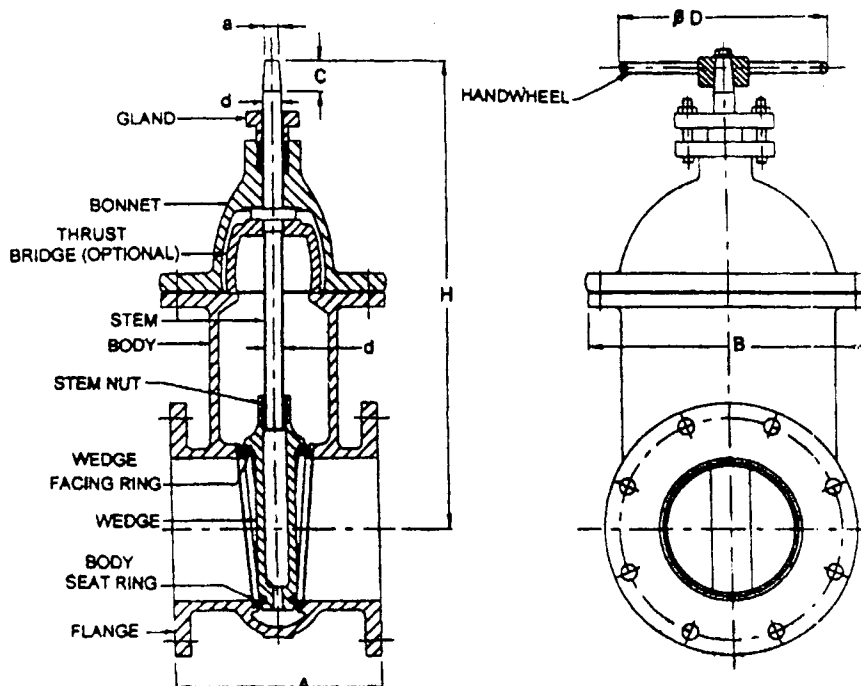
A TYPICAL SKETCH OF A SLUICE VALVE FOR SIZE 150 mm ϕ WITH THRUST PLATE
